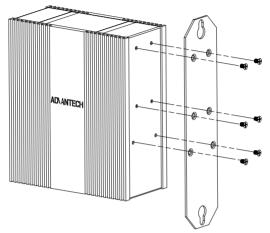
Attach the Bracket to the EDG-6528 with Six Screws
